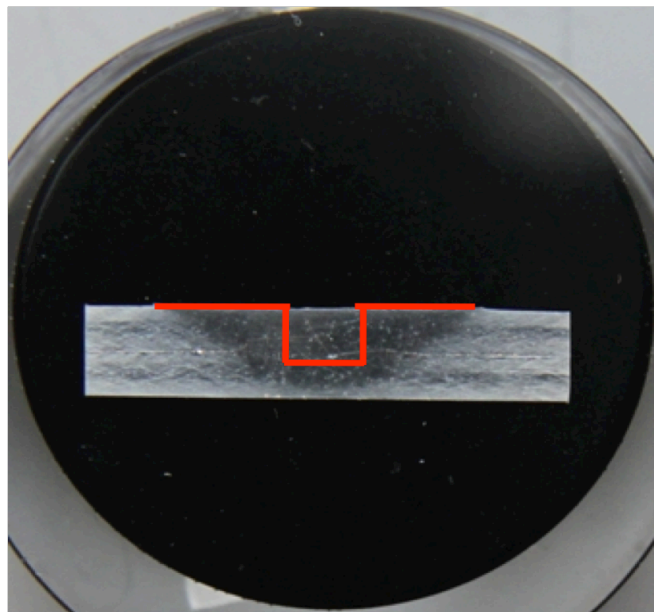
Mounted sample of AZ31B etched to relieve weld zone. Also shown is a graphical representation of the tool profile with relation to the weld zone.
